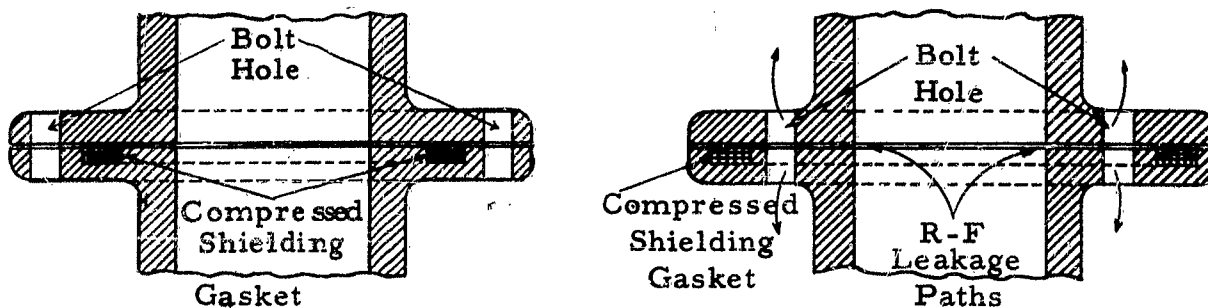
D Proper Location of Shielding Gasket
